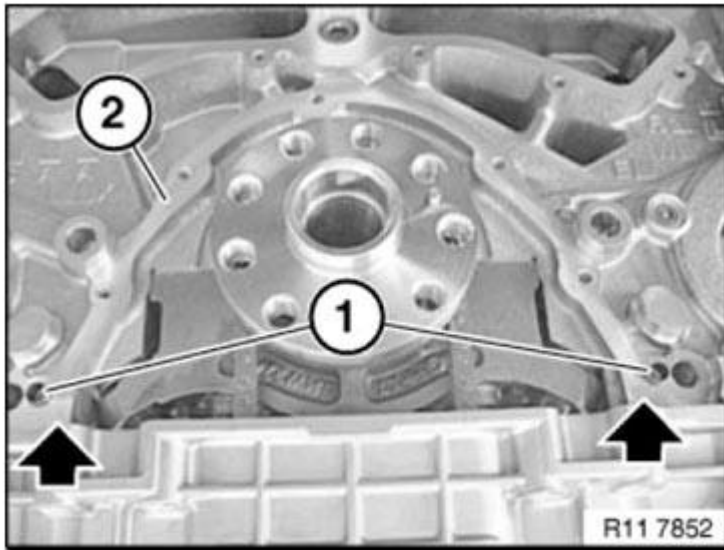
Identifying Fitting Sleeves And Sealing Surface
